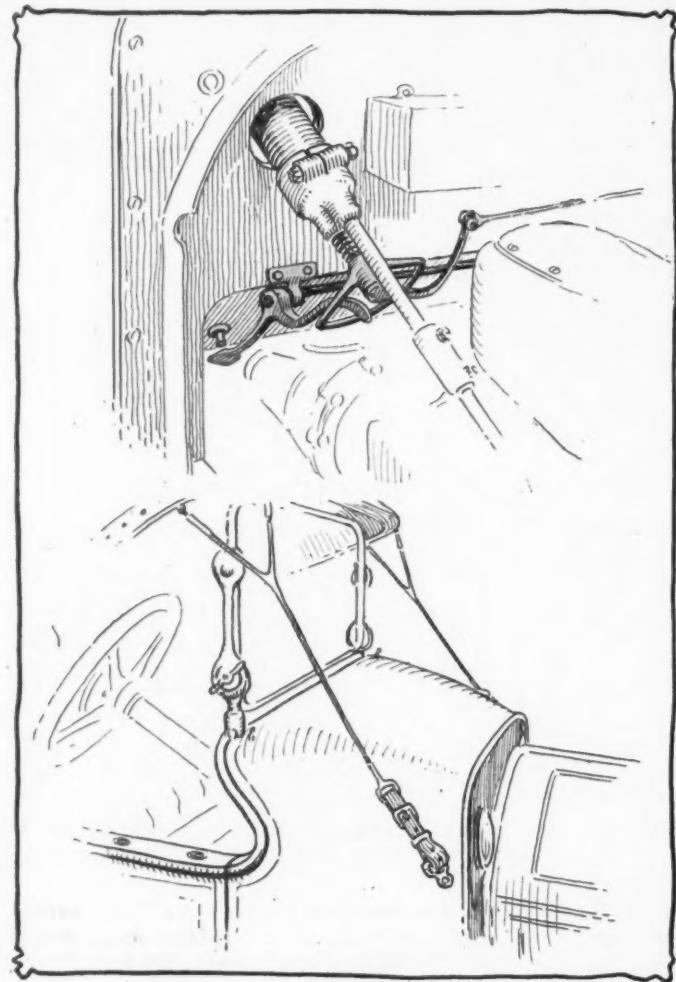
A, Paige throttle and spark cam control; B, Oakland top strap attachment
